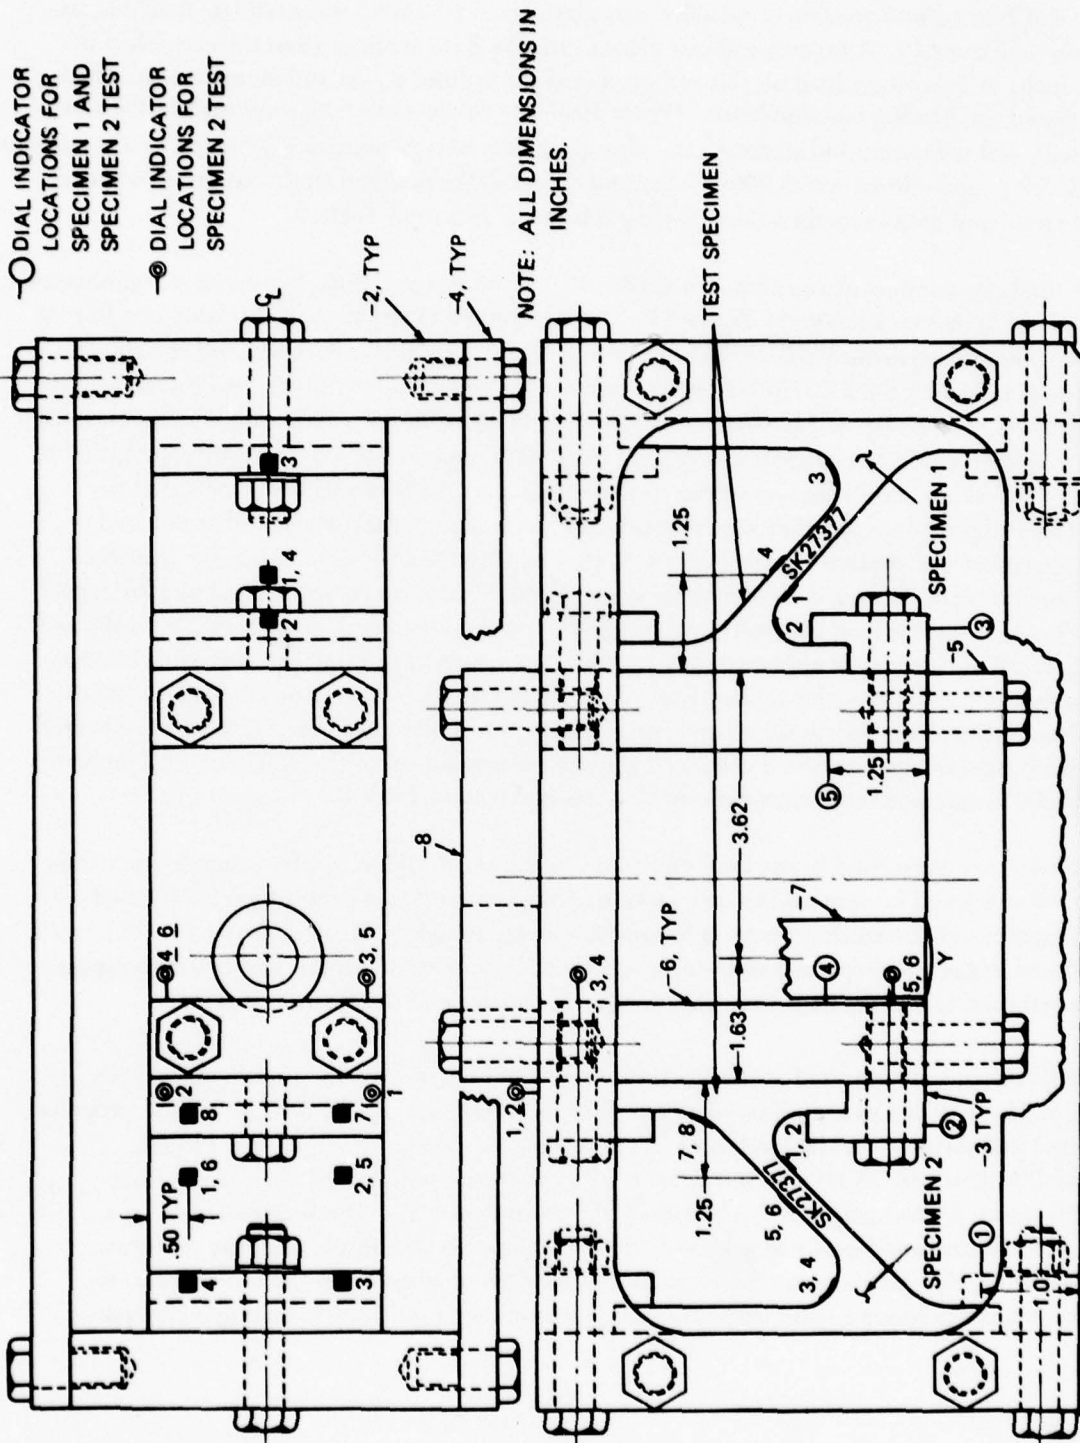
Static Test Fixture for Aluminum Oxide Composite Specimens.
